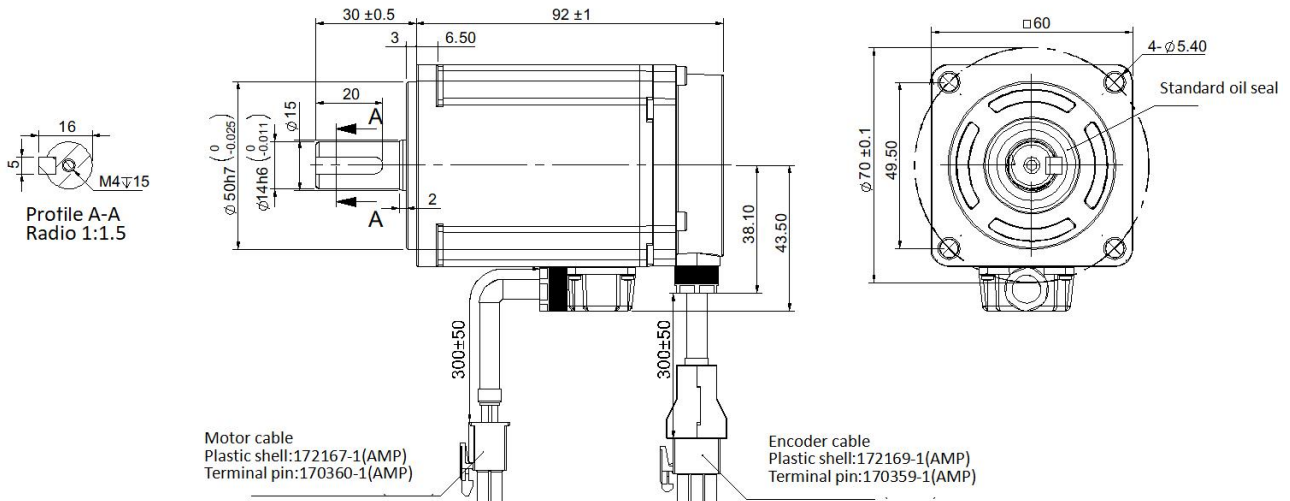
WD series 60 flange servo motor installation dimension drawing
